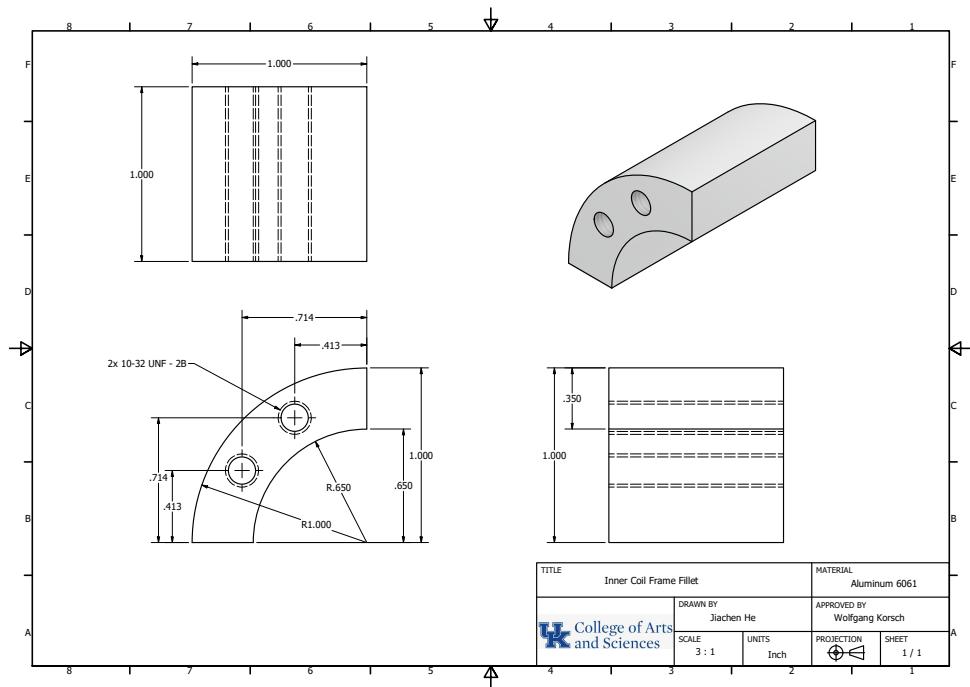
Inner Coil Frame Fillet (Material: Aluminum 6061)
